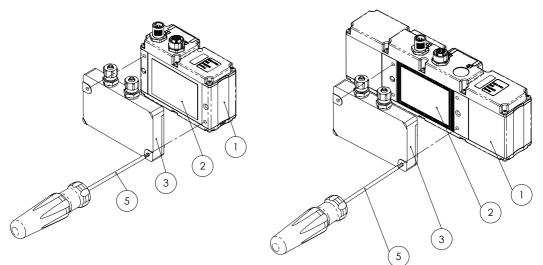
Assembly of the cooling unit of weCat3D MLSL1xx (left) and MLSL2xx (right)
